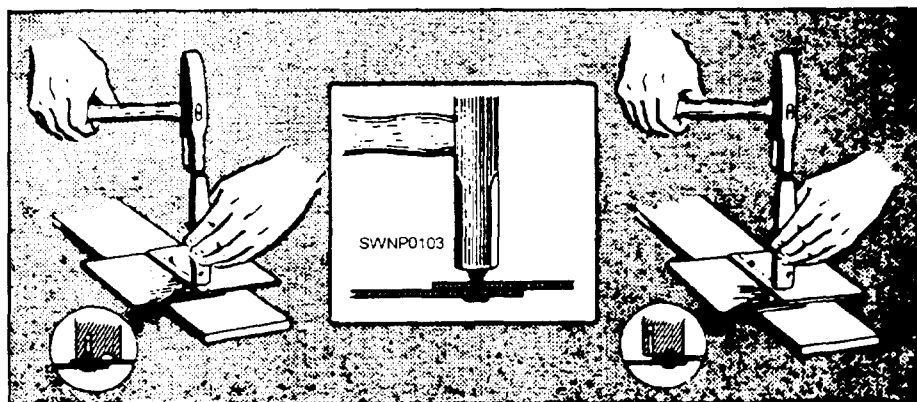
Drawing, upsetting, and heading a rivet.
